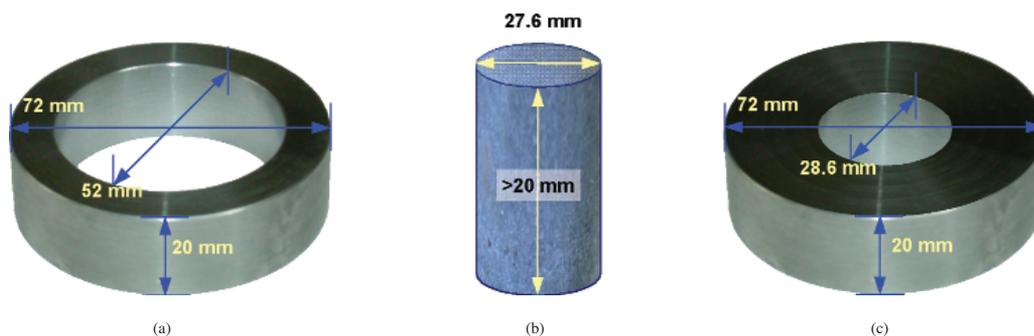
Dimensions of (a) steel ring (b) rock core and (c) steel support ring
